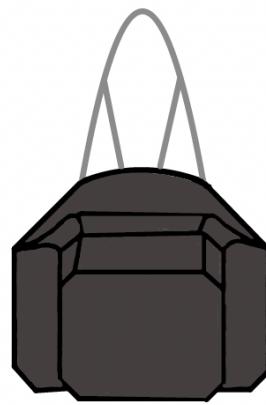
Front view of carbon fiber monocoque chassis [2]
